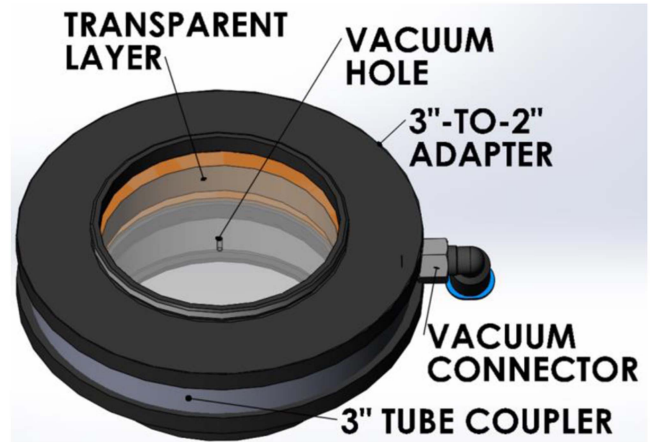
Explanatory drawing for the proposed vacuum sample holder design.
